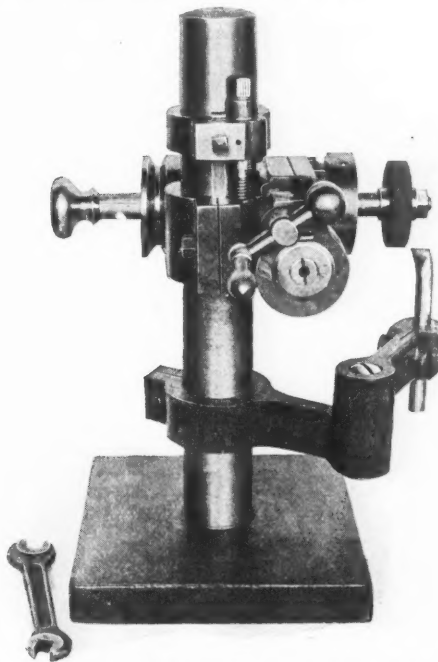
Cutter Grinder for Planer Milling Attachment.
